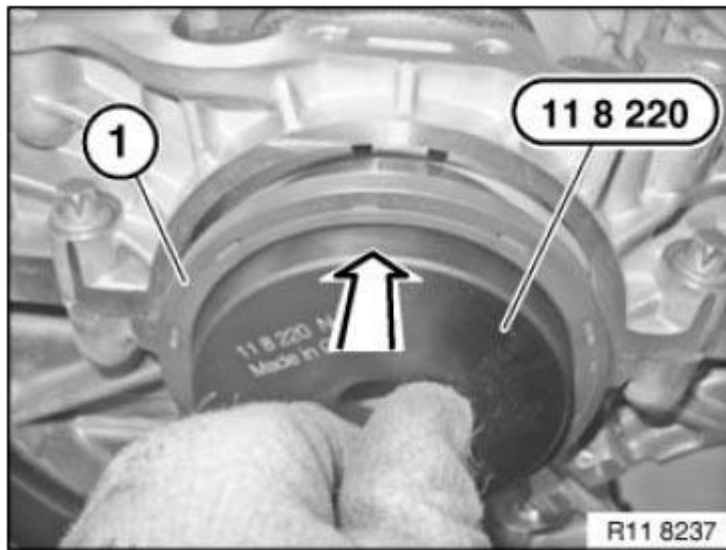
Positioning Radial Shaft Seal On Crankshaft Using Special Tool 11 8 220
